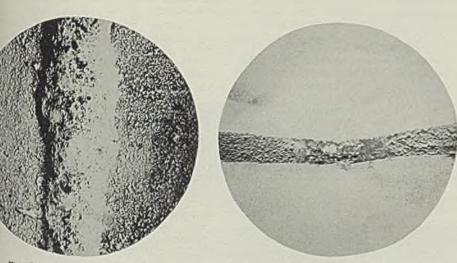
(Left)—Brazing a cast iron end bell of an electric motor. Fig. 6. (Above)—shows surface appearance of a weld in cast iron with cross section through same weld shown in Fig. 7, right above
